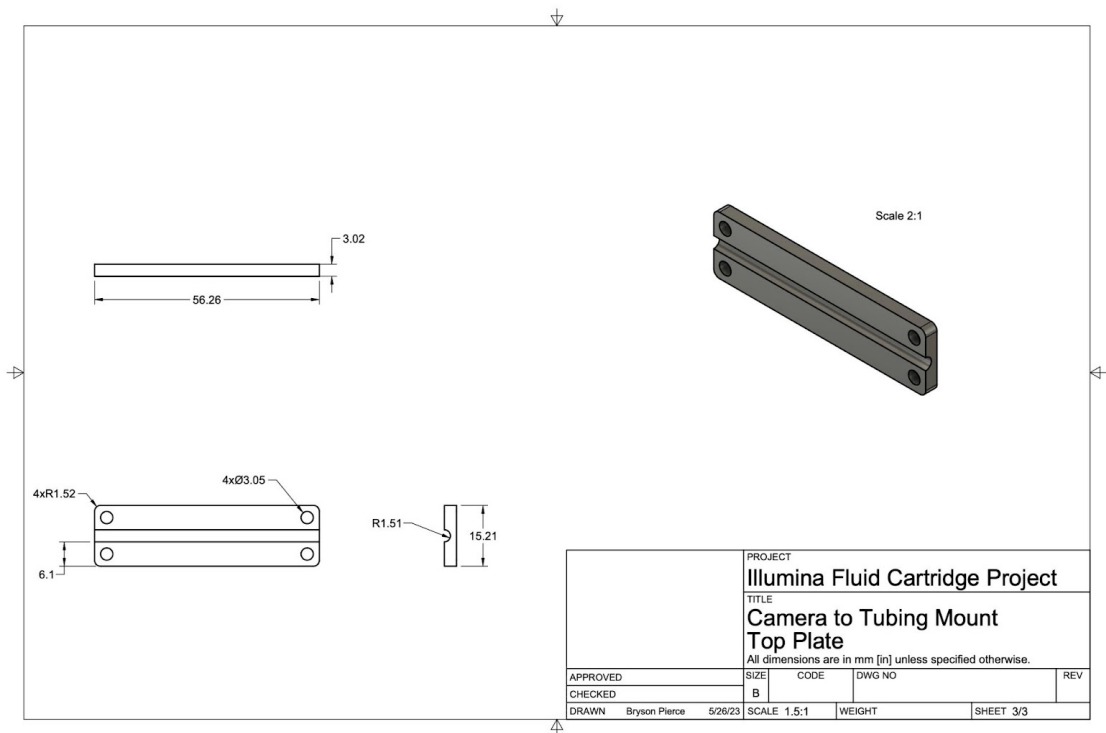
Technical drawing of the top plate component of the tubing mount. This clamped the tubing with the bottom plate in Figure 4b. Can be seen in clearer detail in Appendix C.
